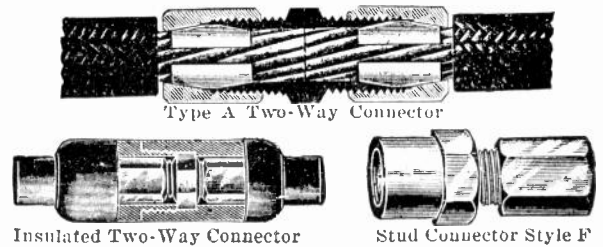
Several other types of solderless connectors, showing a sectional view of the upper one which illustrates the method in which it grips the cable.
